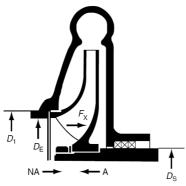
Closed Impeller with Only Front Wearing Ring
